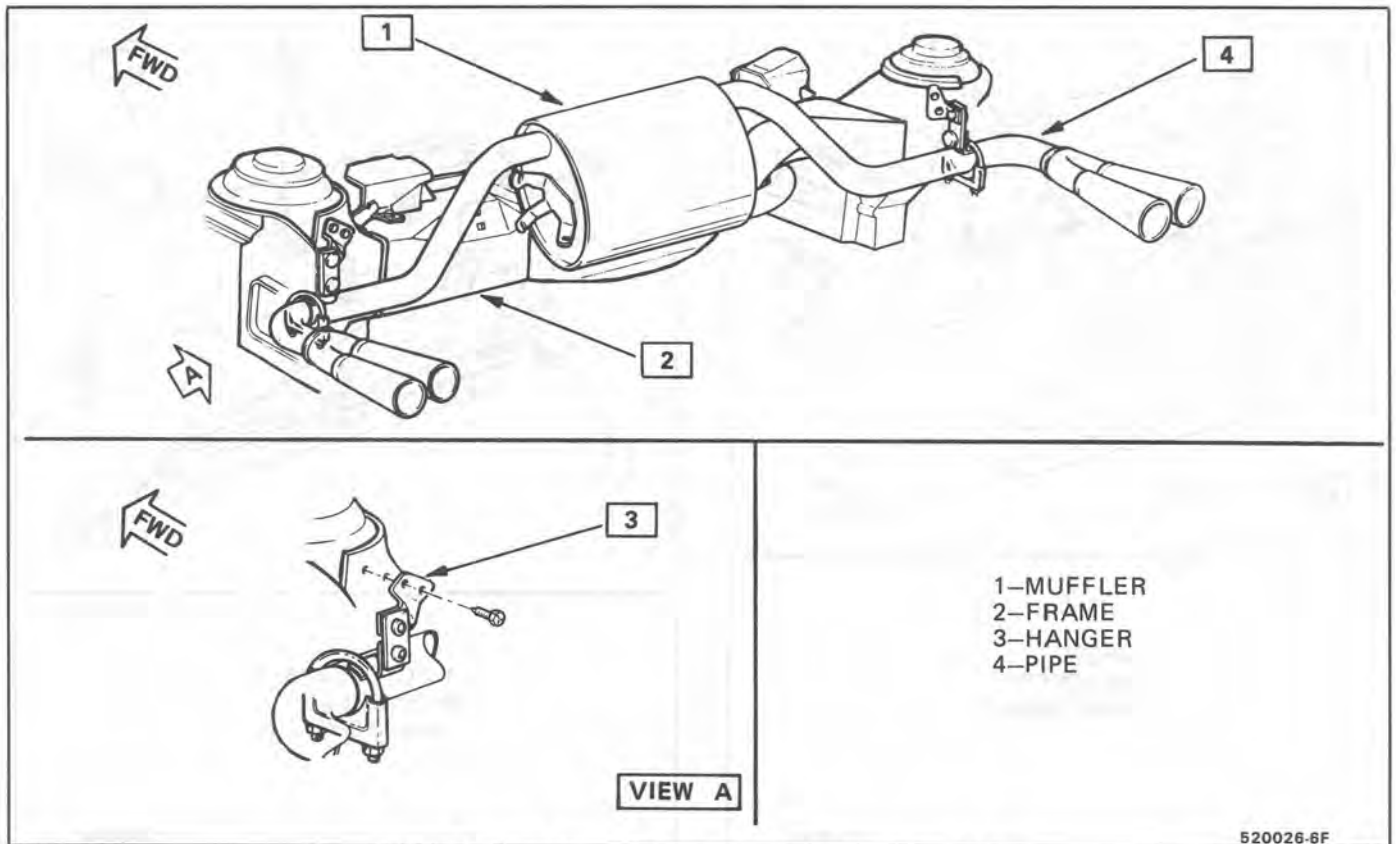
Muffler Assembly and Tailpipe Extension (L44)
